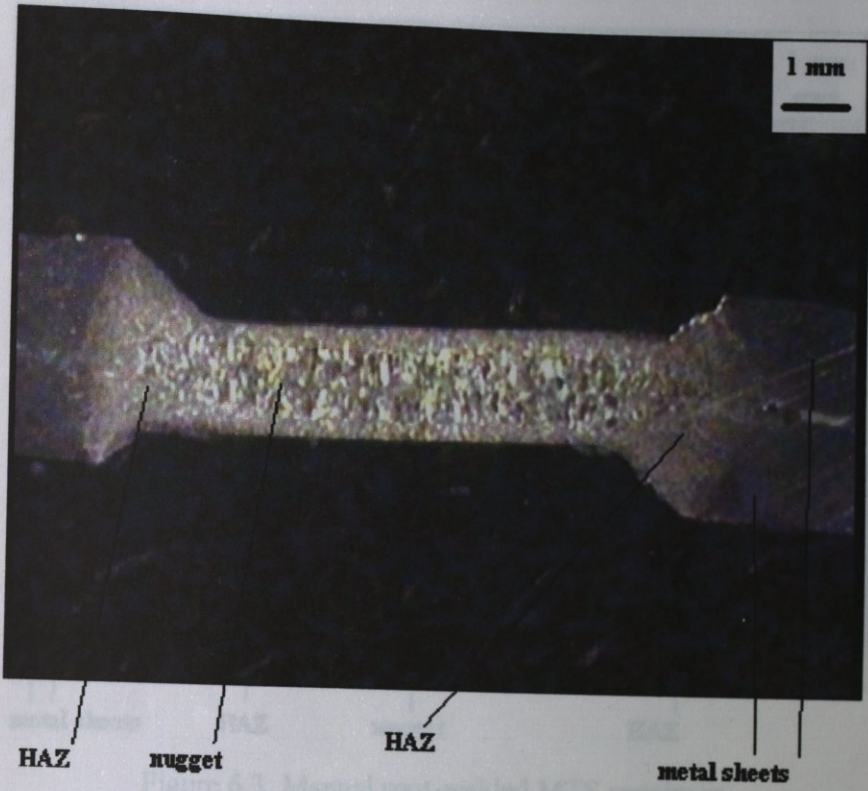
Nipper spot-welded MTS specimen
